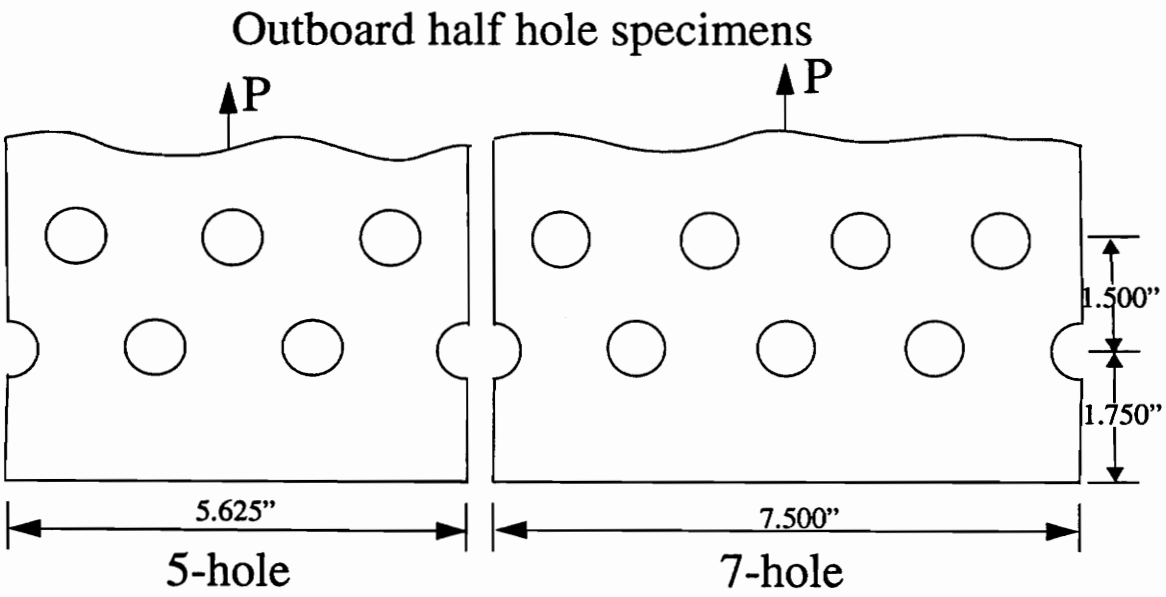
Dimensions of 5-hole and 7-hole specimens
